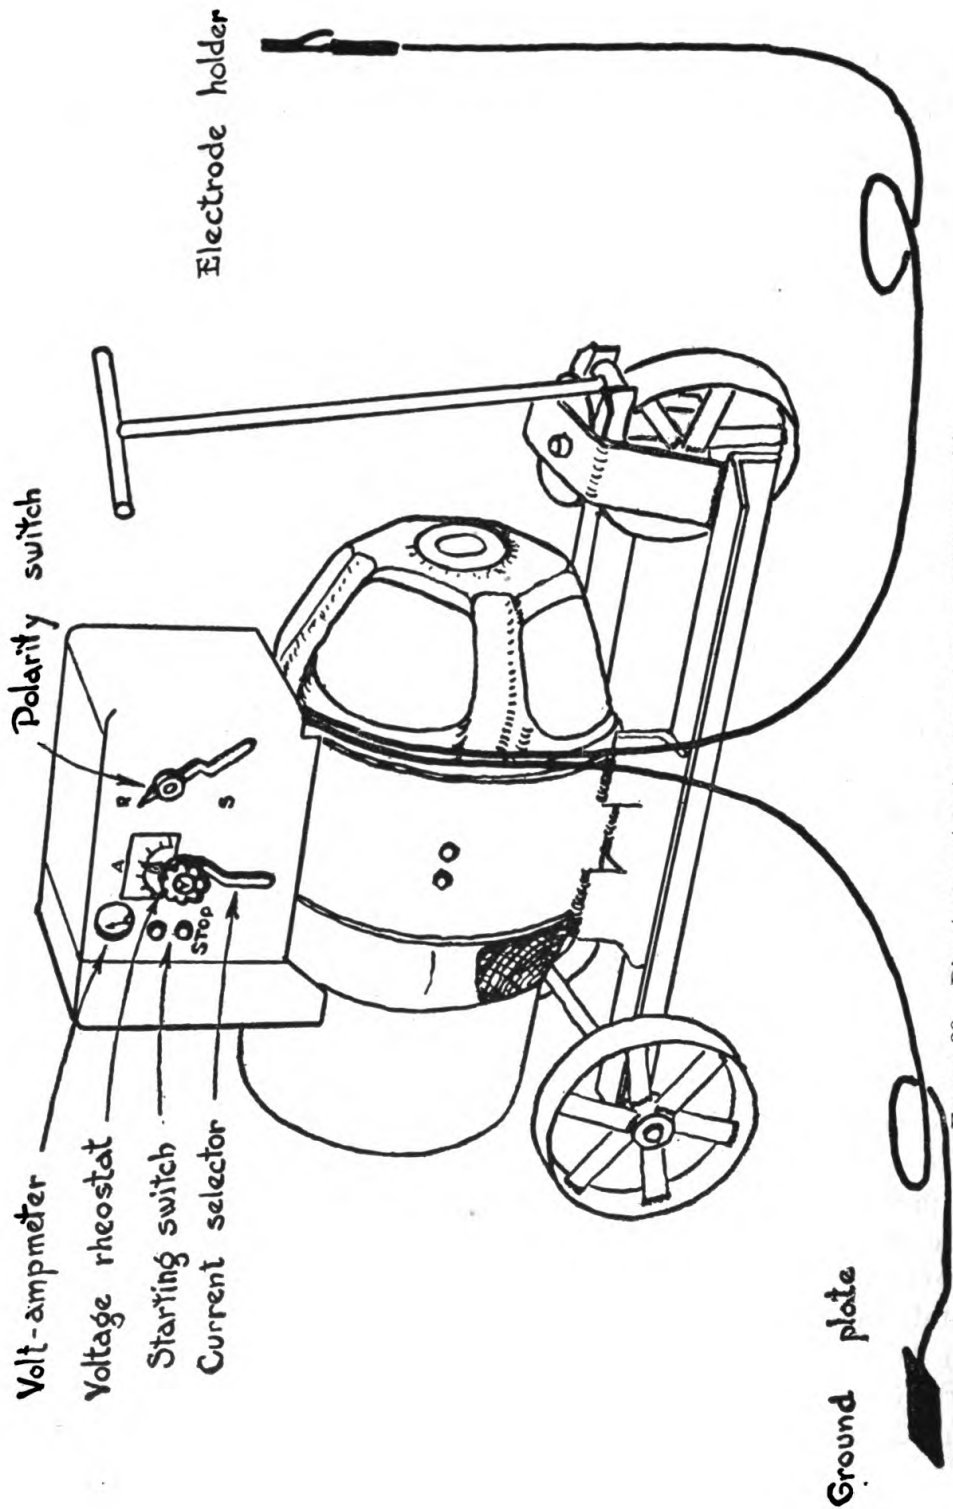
Direct current motor-generator arc welding machine.
